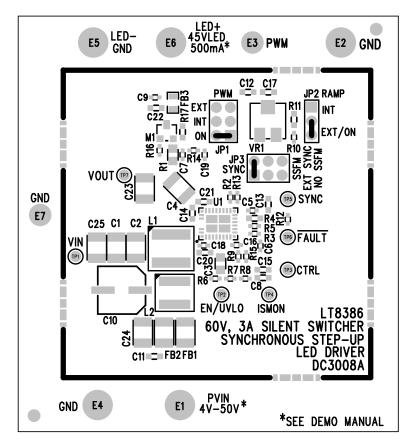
EMI shield clips can be soldered to the six placeholders on the PCB. A square 44mm x 44mm outline shows where the EMI shield fits onto the PCB.
